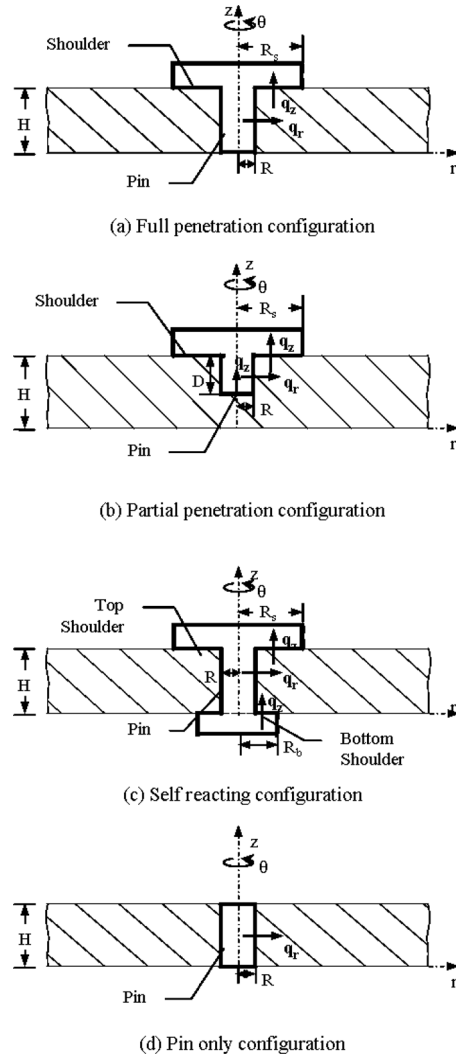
Schematic of various FSW pin tool configurations ((—) pin tool; (□) workpiece)
